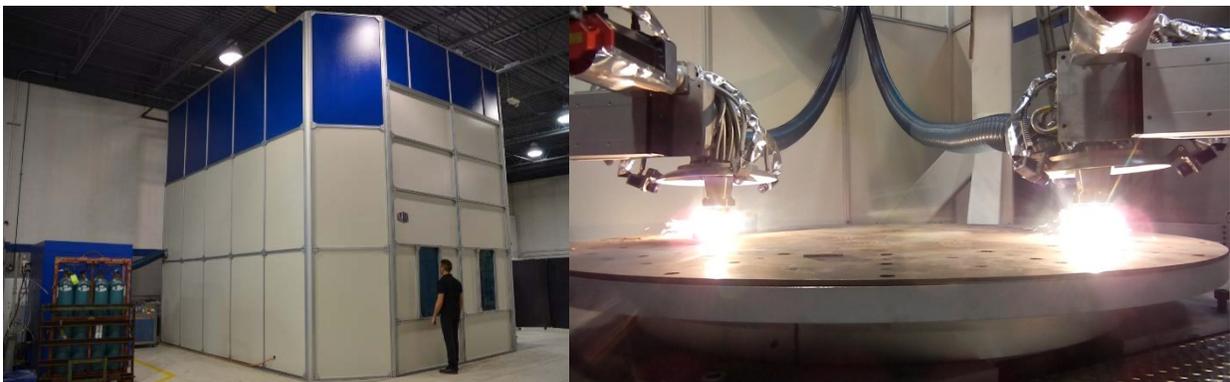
DMD Multi-nozzle system. Left: DMD machine. Right: Dual nozzle technology for rapid 3D deposition.
